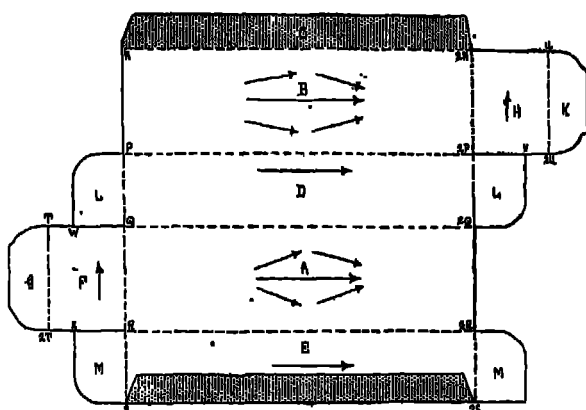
POPULAR SINGLE-PIECE PACKET FOR SALE OF SIXPENNY TUBES OF TOOTH PASTE.
